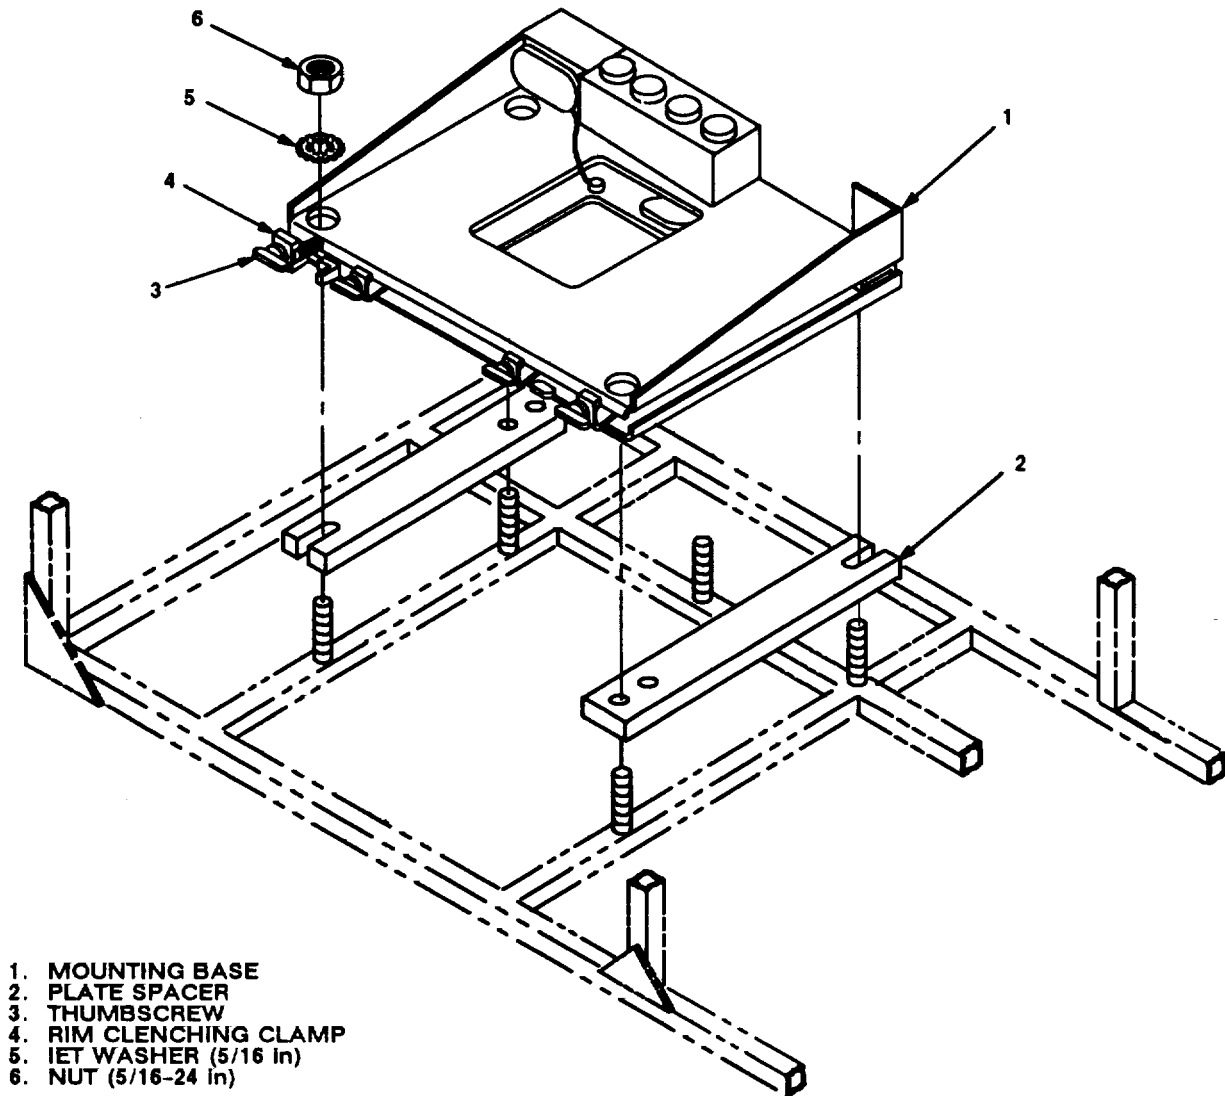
Mounting Base Installation: Bottom Equipment Rack Shelf
